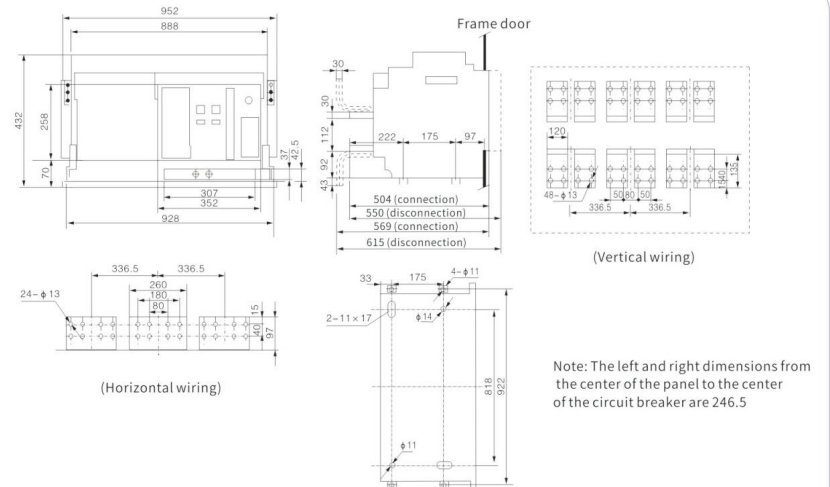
Outline and installation dimension of the draw-out type circuit breaker (W1-6300/3 In=6300A)
